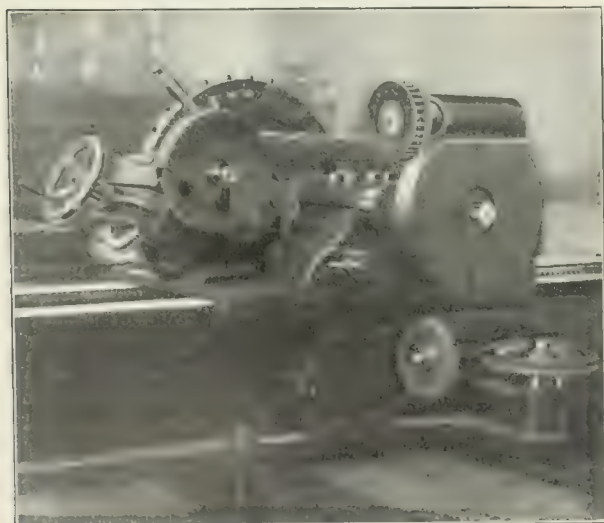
View Showing the Arrangement of the Drive for the Adjustable Head
